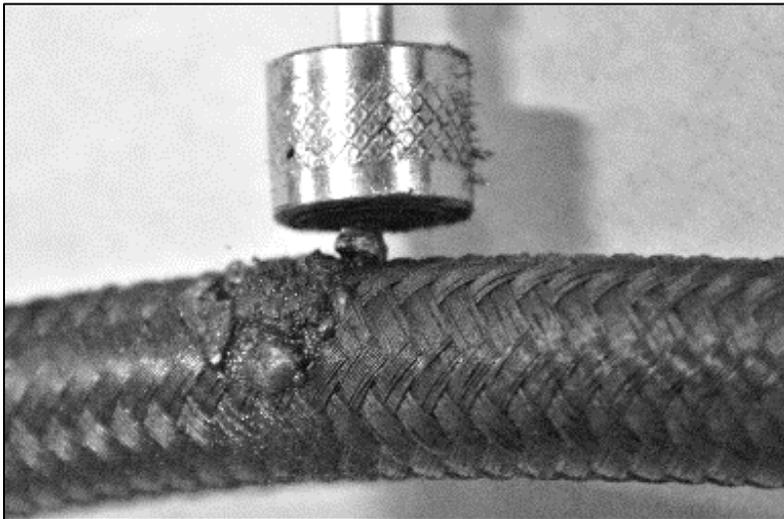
Power Steering Hose Failure of Steel Wire Braiding with Beading and Magnet
